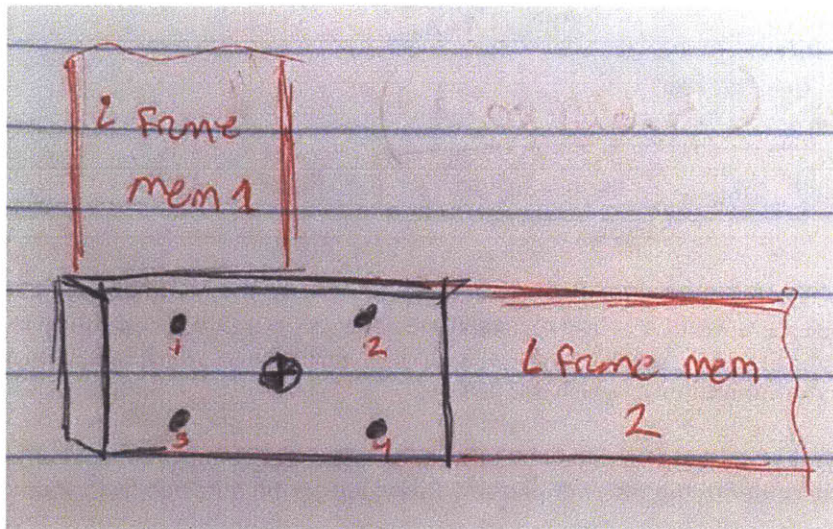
Fastener Pattern: This image depicts the fastener pattern that will be used to connect the two members of the L-Frame. Fastener 1 and three will be secured unto L frame member 1 and fasteners 2 and 4 will be secured unto L-frame member 2. The center of the fastener pattern corresponds with node B in figure 11. Thus the force and moments that were evaluated at node B will act at the center of this pattern.
